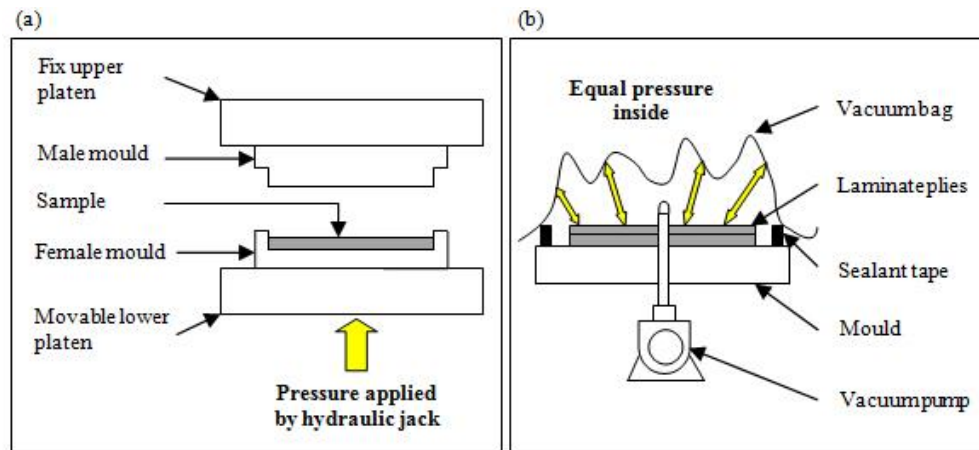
Composite fabrication methods: (a) compression moulding; (b) vacuum bagging.
